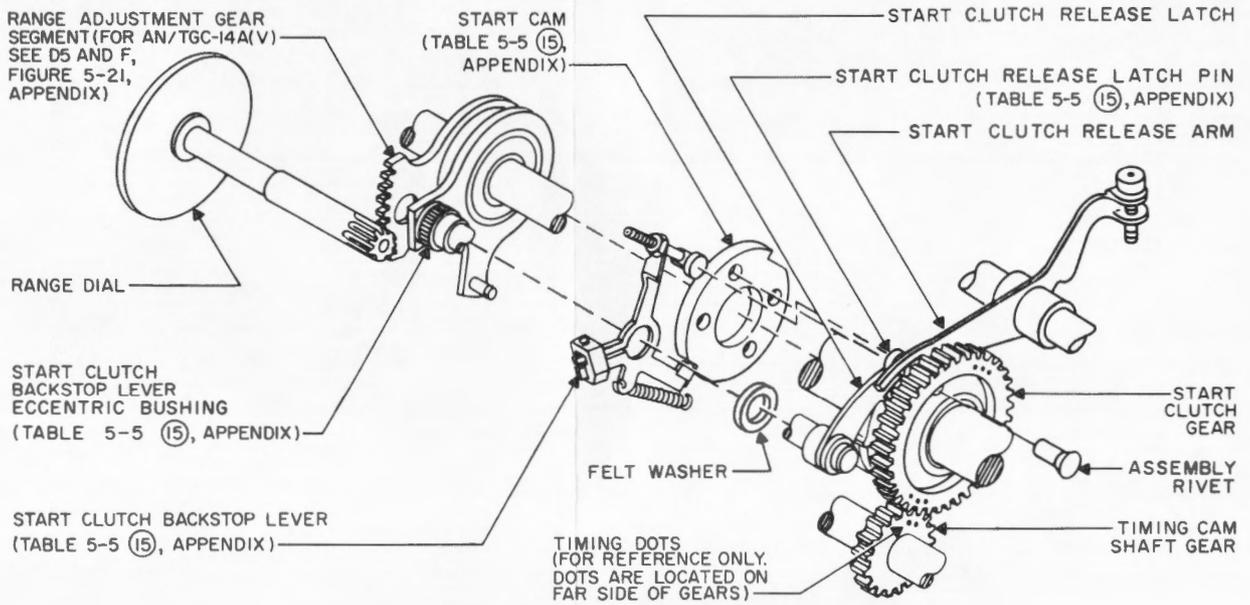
Start Clutch Release Mechanism, Exploded View
